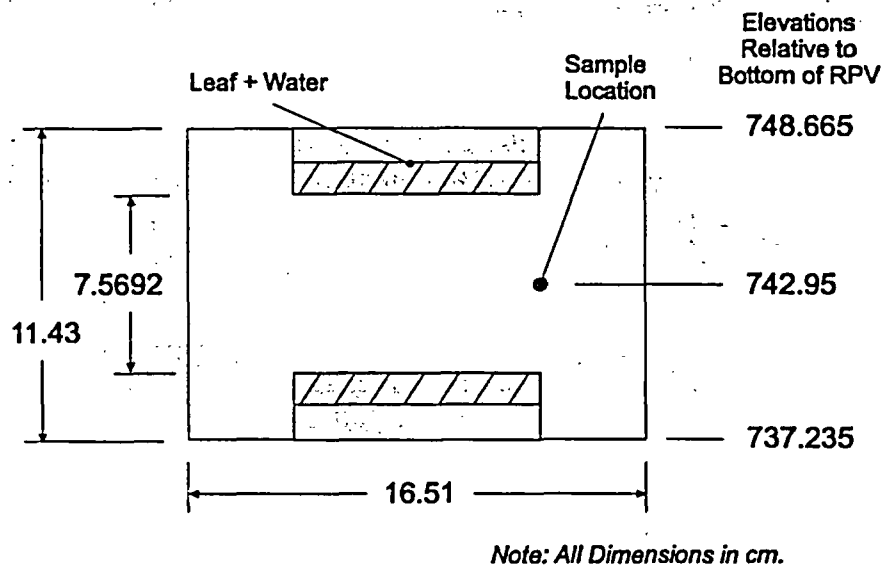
Front View of the Hatch-1 RAMA Jet Pump Riser Brace Pad
